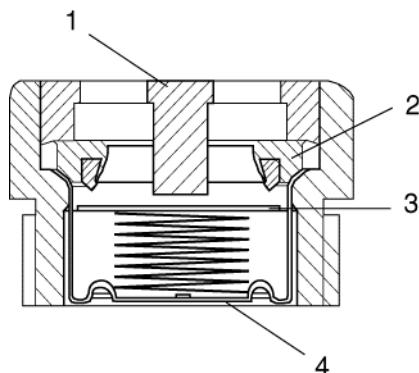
Sectional view of the safety valve, for legend see [Table 8](#)
